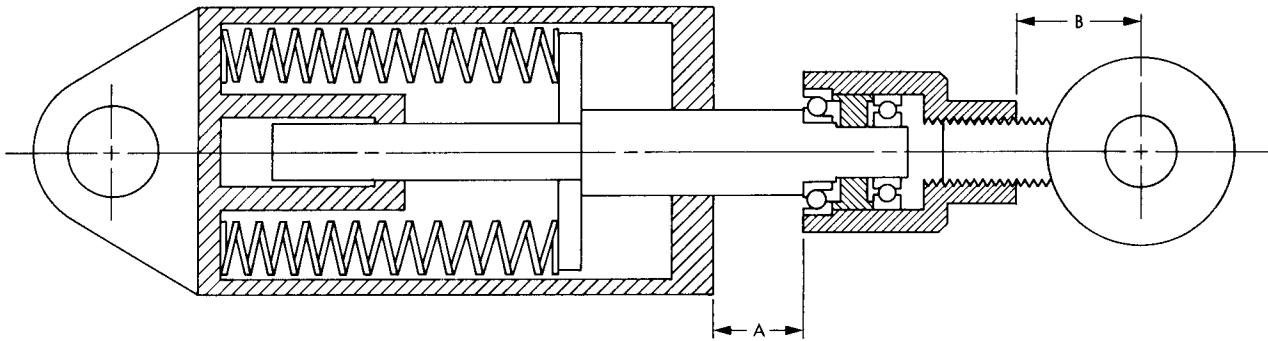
Schematic drawings of elevation drive spring loaded support struts
